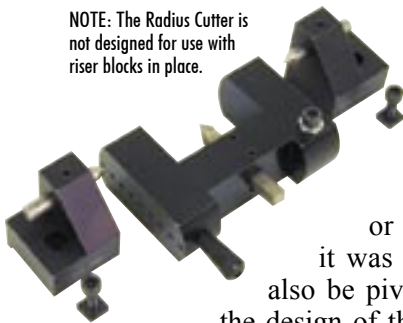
The radius cutting attachment can cut a convex or concave radius. Unlike most lathe operations, the tool is moved up and down rather than horizontally.
